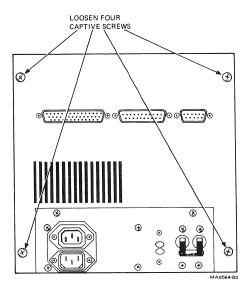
Removing the Tabletop Cover/Bezel Assembly
